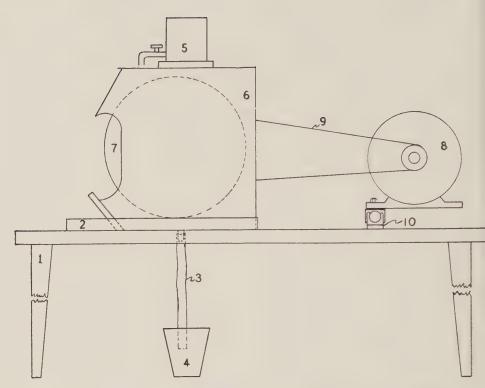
Side View of Complete Grinding Set-Up. 1, table; 2, splash pan; 3, drainage tube; 4, drainage bucket; 5, water reservoir; 6, plyboard splash guard; 7, grinding wheel; 8, motor; 9, drive belt; 10, floating-rail motor mount.
